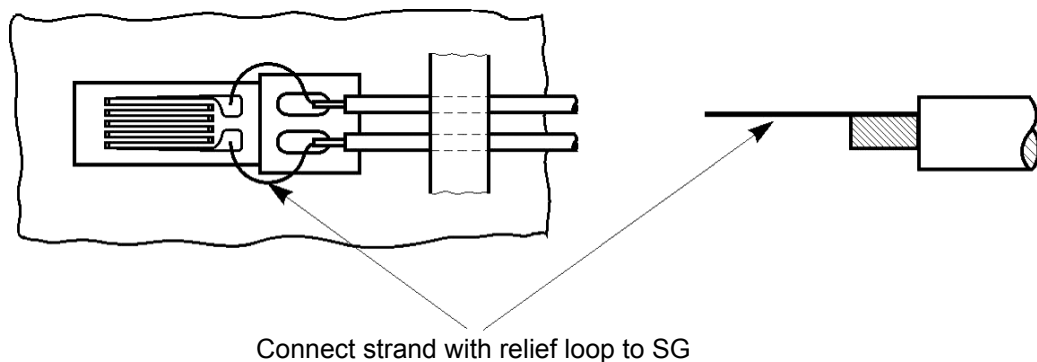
Connecting cable wires onto SG with open solder tabs
